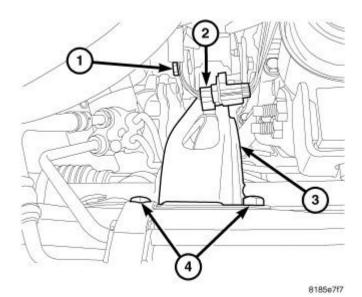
Rear Mount Through Bolt, Oxygen Sensor Connector, Rear Mount & Rear Mount Retaining
